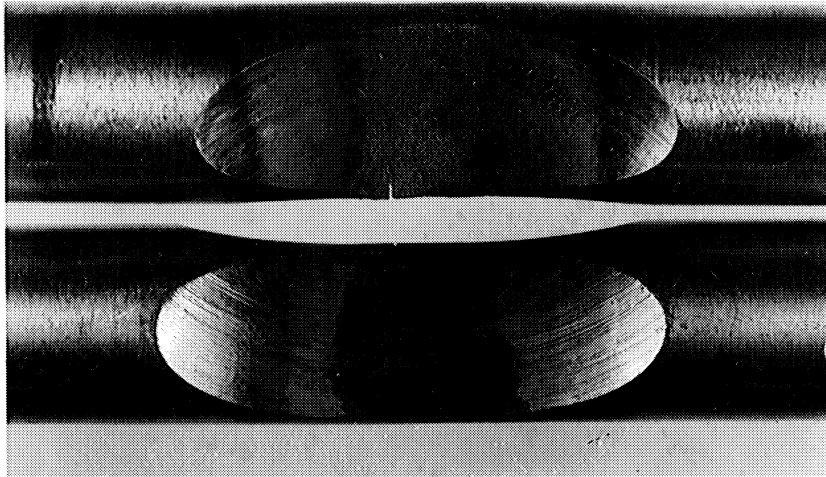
Thermal-Shock Specimens of Hollow-Cut Cross Section. Top specimen is Type 347 stainless steel; bottom specimen is Inconel.
